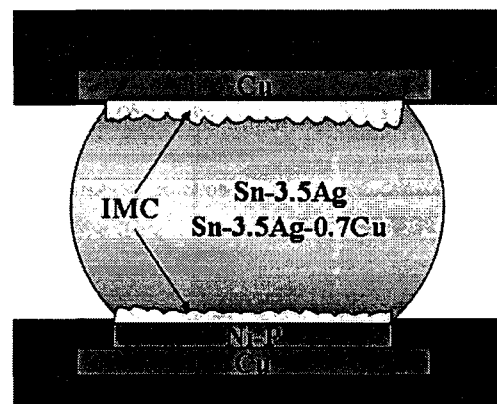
Schematic illustration of the sandwich solder joints used in this study.
